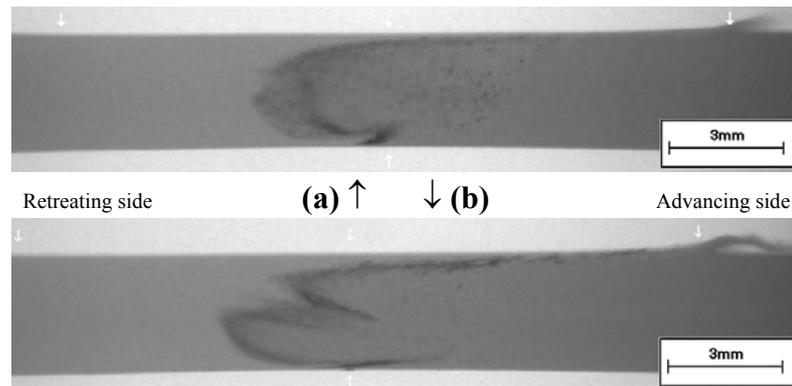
X-ray radiographic images of sections of two welds taken in the direction of weld traverse. The two welds were both made in 2024-T3 to 2024-T3 and with the same welding conditions: (a) using a tool with threaded probe (DMC-A1) and (b) using a tool with threaded probe and 3 straight flutes (DMC-A9).
